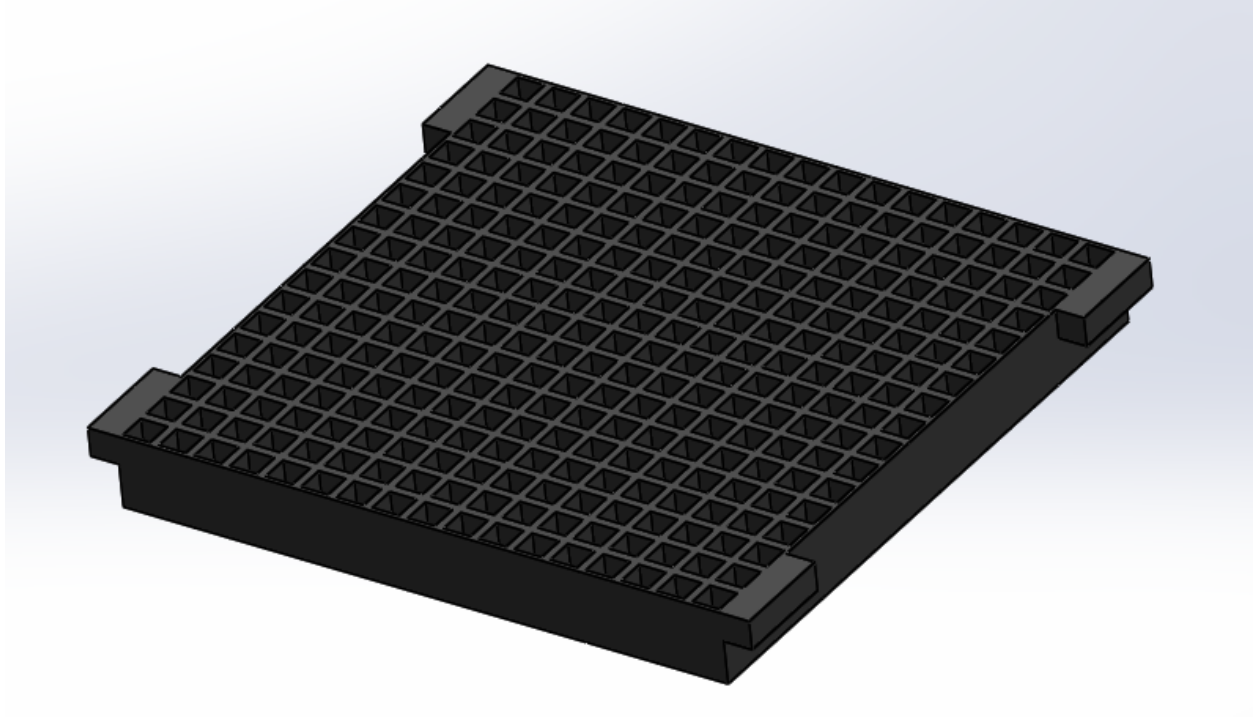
Angled view of the bracket that holds the stainless steel tubes in place while the fuel rods are placed into the tubes
